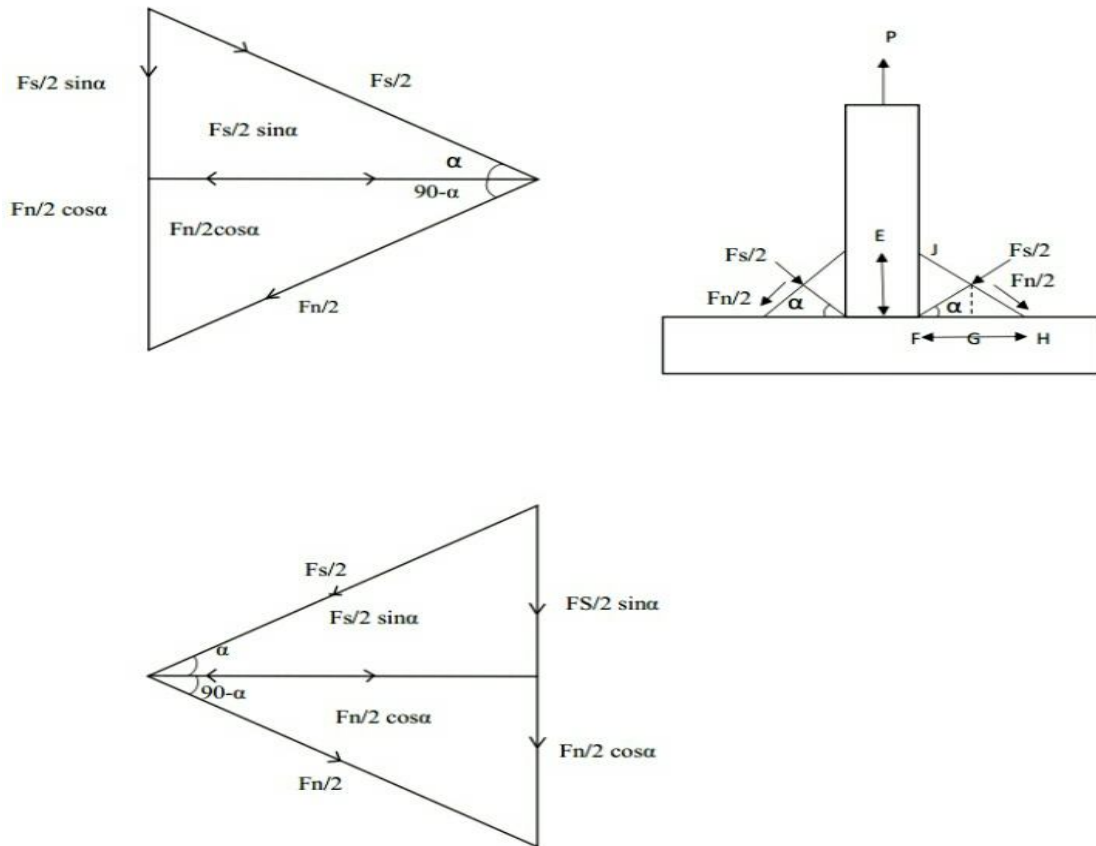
Resolved figure showing horizontal and vertical components of force acting on the T- joint weld
